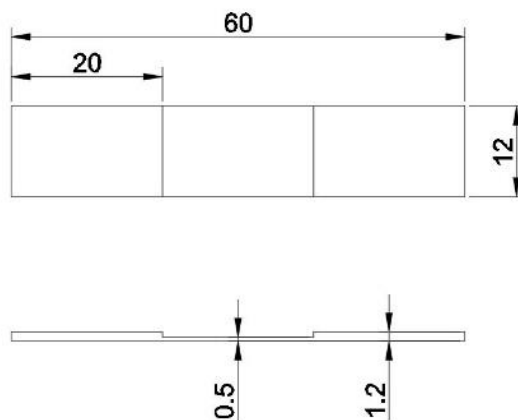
Shape of the brass sample, the middle zone (thickness is 0.5 mm) for the electroless Ni–P coating and the fatigue test: all dimensions in mm.
